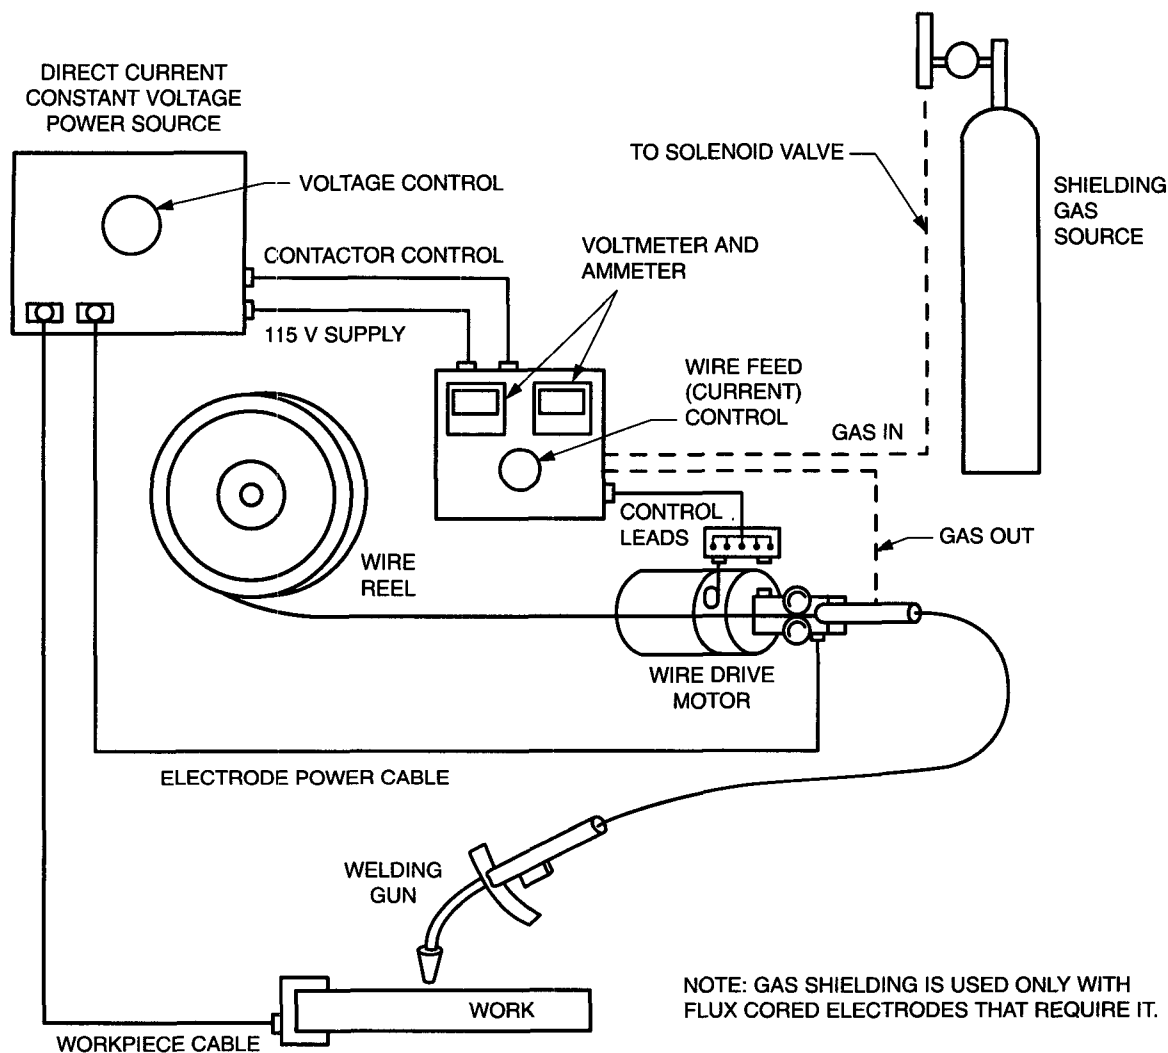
Basic Equipment for Flux Cored Arc Welding
